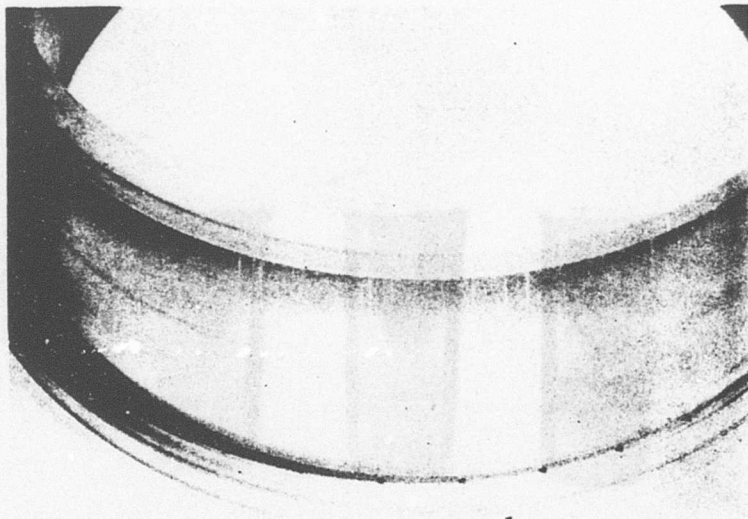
View of Cone Race Surface - Bearing S/N 73-73.
